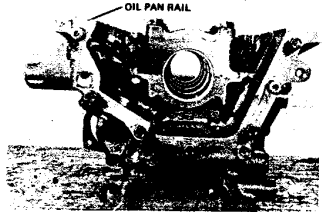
Typical deep skirt block with the oil pan rail surface well below the crankshaft centerline. The block pictured here is upside down on a workbench.
